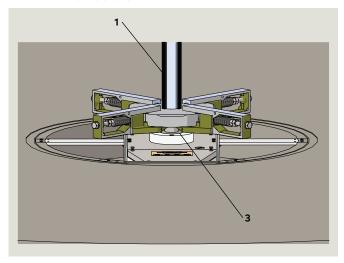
Center shaft bottom plug installed in speed control drive shaft
